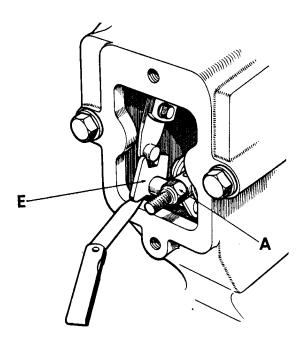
AUTOMATIC HOLD MECHANISM ADJUSTMENT
